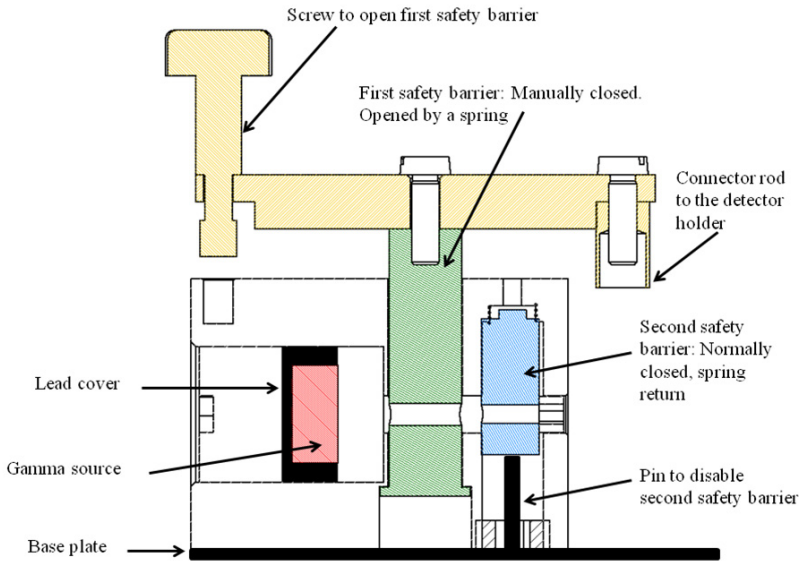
Details of parts in sources holder (Showing the configuration for one source and open safety mechanisms)
